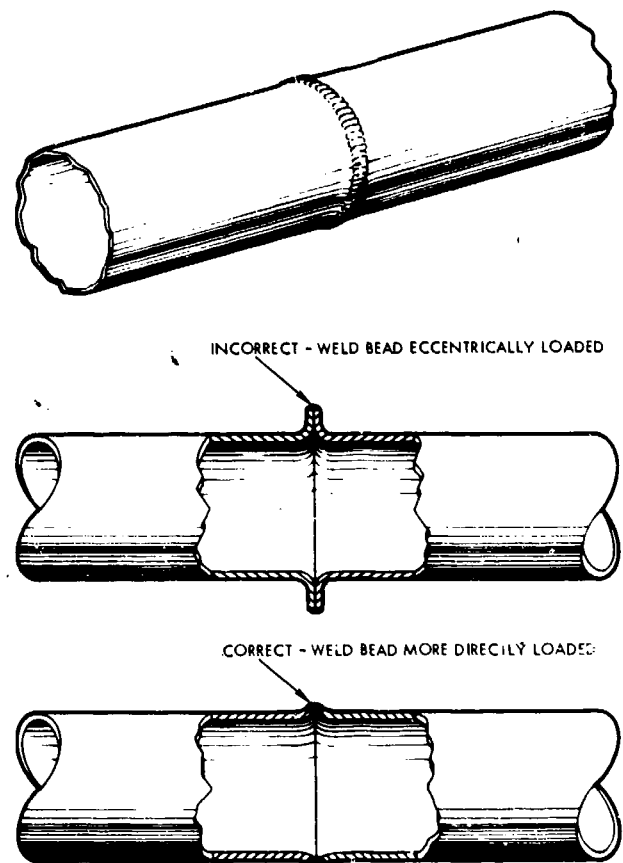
Burn-Down Flange Weld Joint
